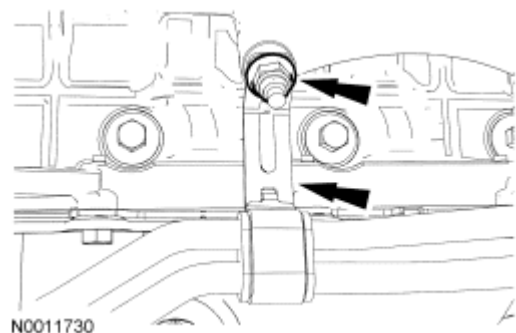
Locating Transmission Cooler Tube Bracket And Nut
